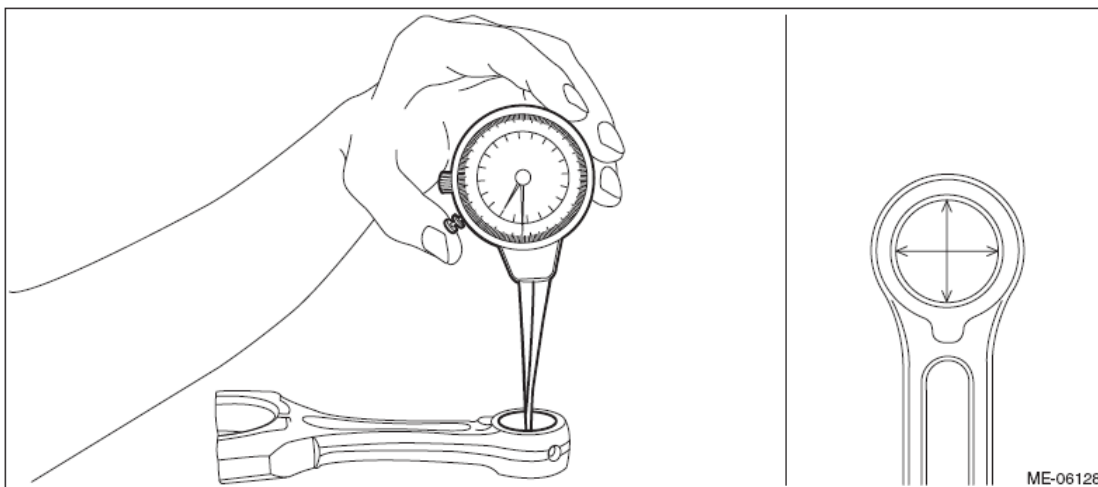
Measuring Inner Diameter Of Connecting Rod Bushing
